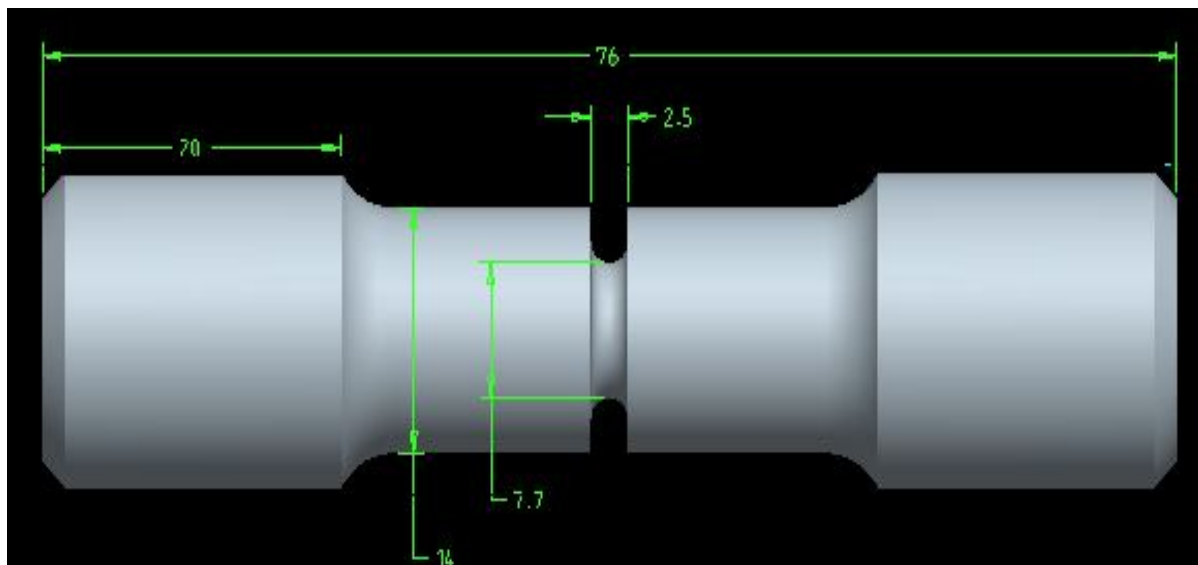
2 CAD Model and Dimensions of Grooved Specimen
